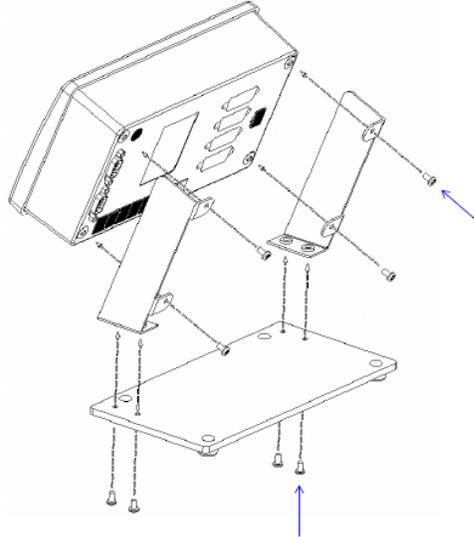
Drawing depicting the assembly of CM-400 with standard desk mounting kit.
